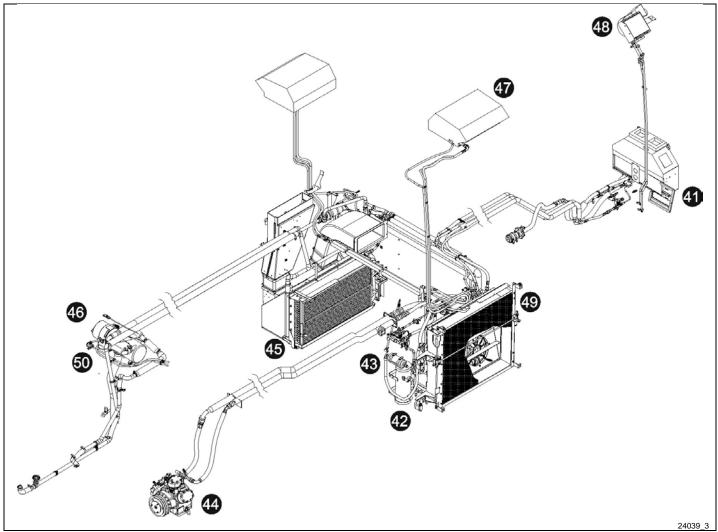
LUBRICATION AND SERVICING POINTS - HVAC UNIT
